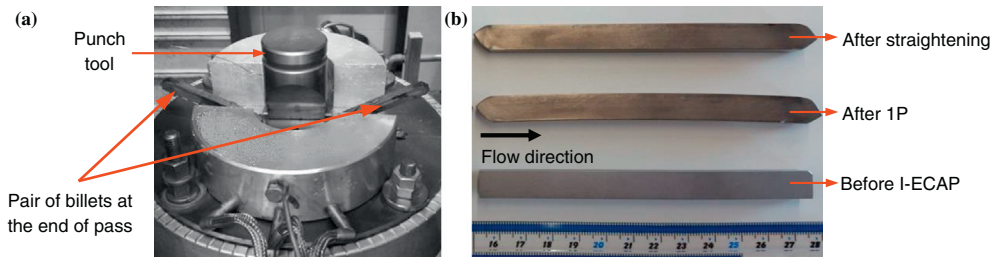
(a) The pair of CP-Ti billets can be seen emerging out at the end of first I-ECAP pass, (b) Appearance of the CP-Ti billets, unprocessed billet (bottom), billet after first pass of I-ECAP process showing bowing (middle) and straightened billet after secondary operation (top).
